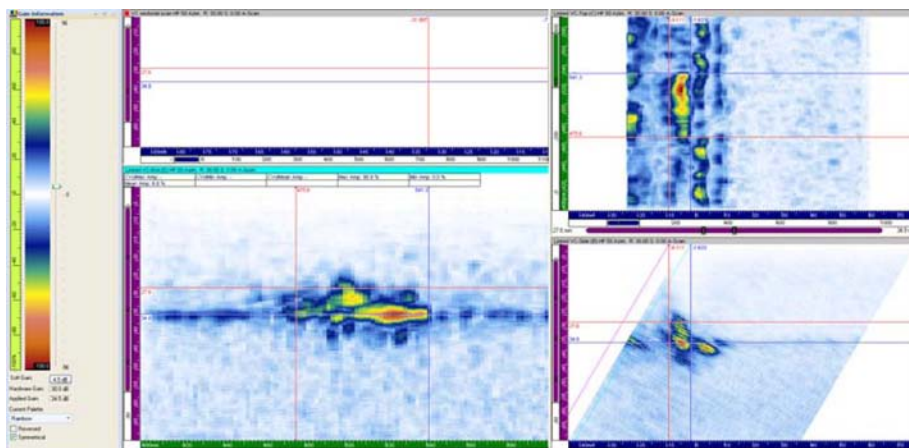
Specimen 9C-034 Flaw 1 After Weld Crown Removal at 2 MHz
